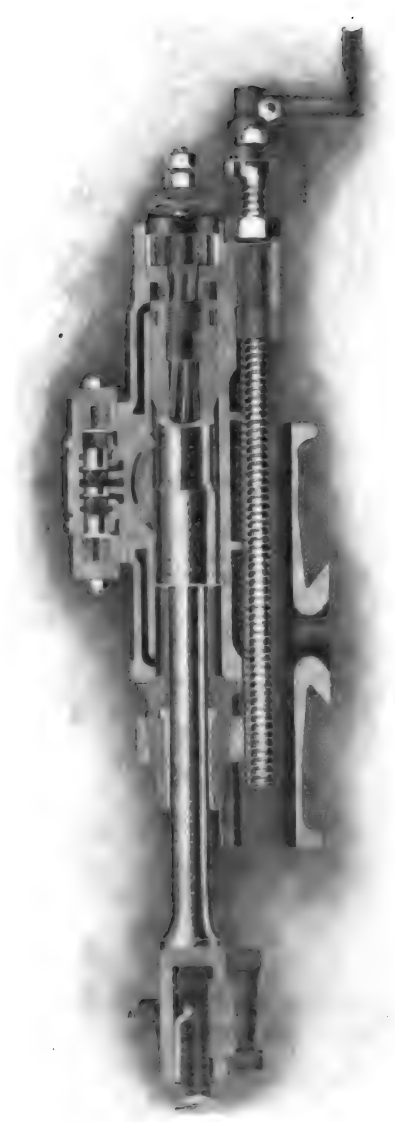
"Sergeant " Rock Drill. Ingersoll-Rand Co.
